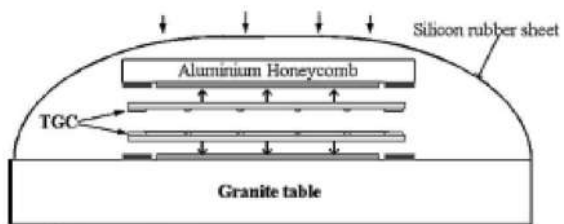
Above, a double Aluminium honeycomb cover is being placed before covering with the silicon rubber sheet. A drawing of the layering is shown below, left. Only the lower honeycomb and the granite table have full vacuum applied to it, to keep the surfaces flat, while the vacuum under the silicon rubber is -0.1 atm.
